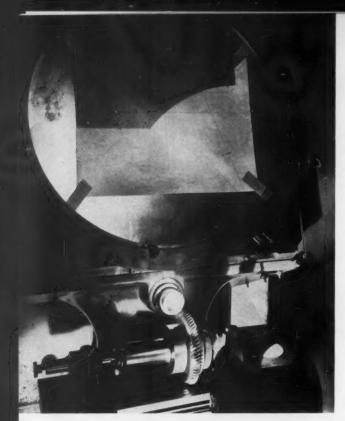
An optical comparator is used to check the ground contact line of a cutter tooth. In practice, this contact line is in the form of α radius.
